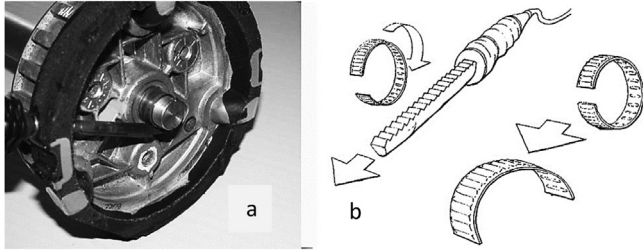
a) A releasable steering wheel airbag mechanism where hot probe engages with the releasable bolt fixture on a cut away steering wheel hub. b) detailed illustration of Probe/SMA Collar interface [28].
